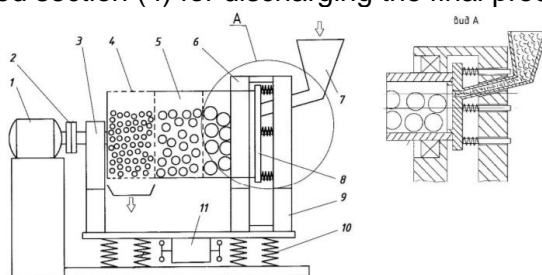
Vibratory-rotary mill of Tambov State Technical University
